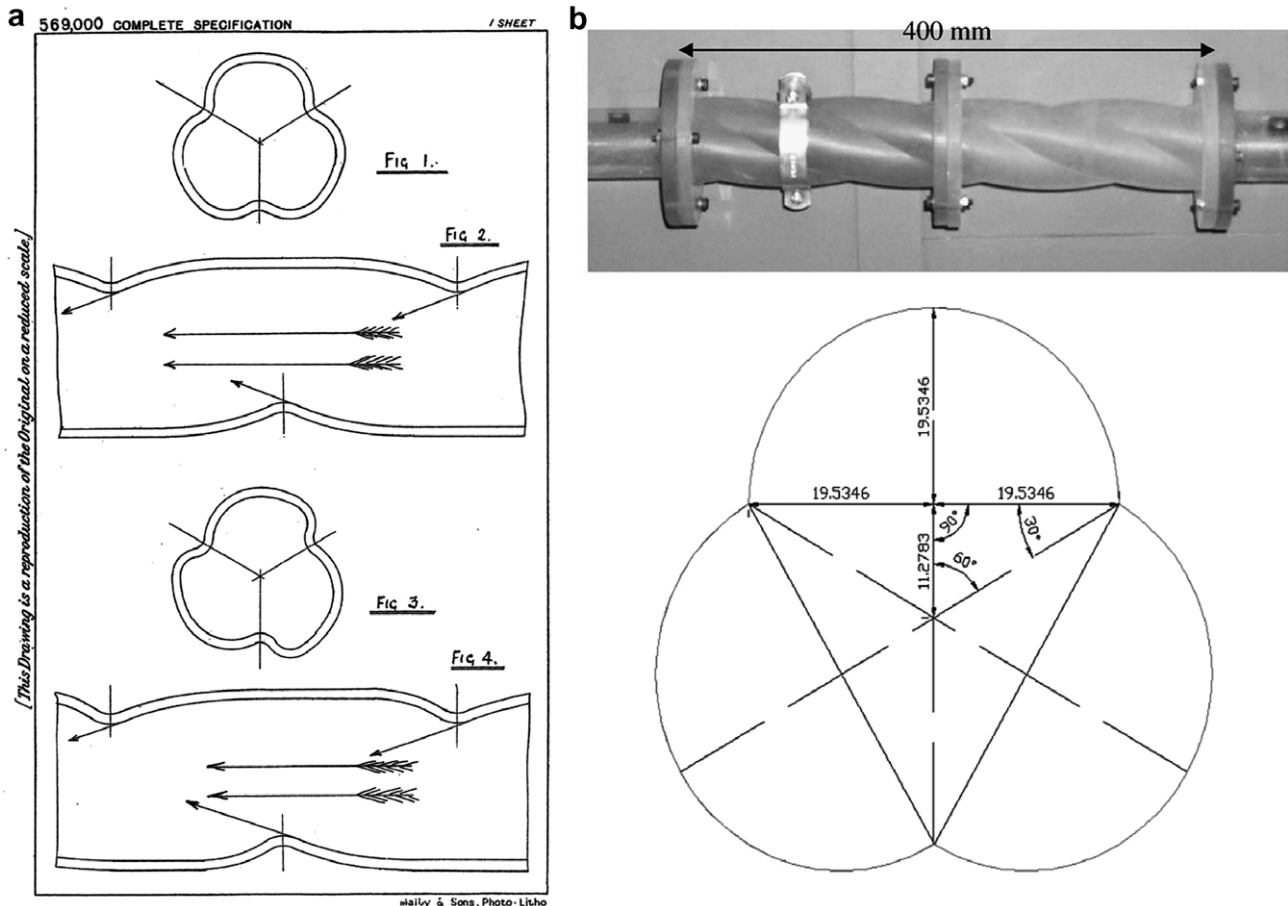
(a) Patented design of a 3-lobed boiler tube by Spanner (1945); (b) Helical turbulence inducing test pipe geometry (dimensions in mm).
